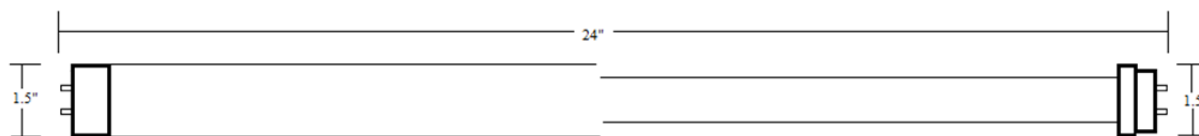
M16377/86-001 lamp dimensions (inches).
